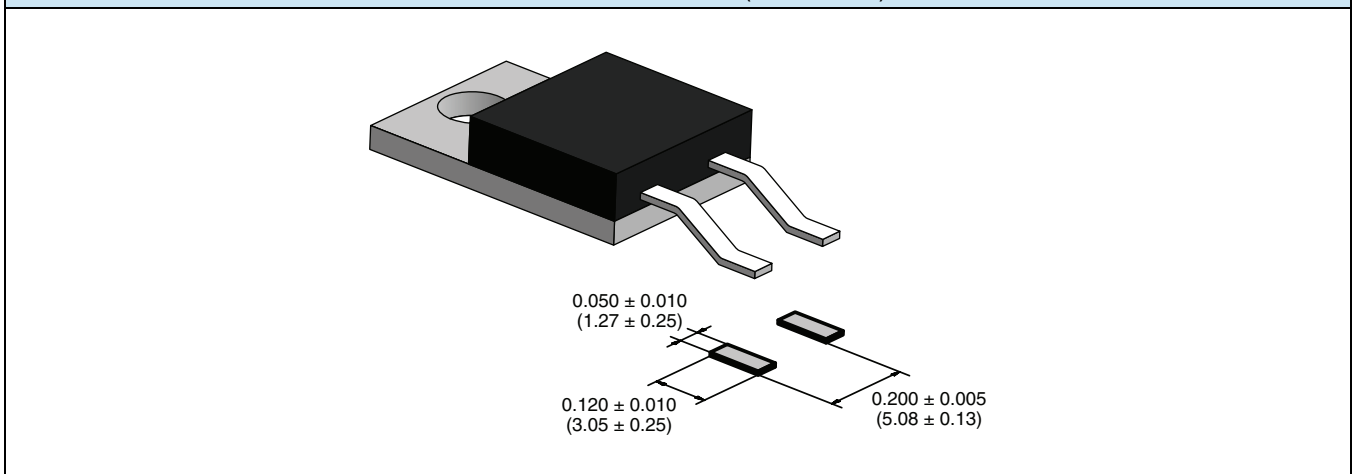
VPR220SZ FORMING DIMENSIONS in inches (millimeters)
